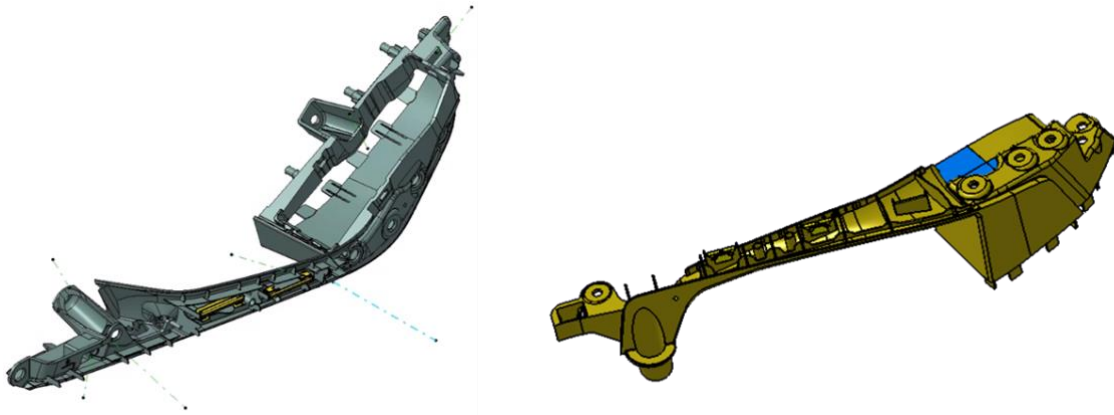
F7x driver Grab Handle (right) and passenger Grab Handle (left)
